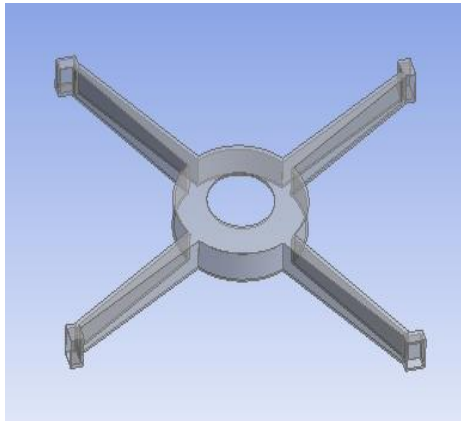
CAD model of Rotor Van Blade and design specifications of Rotor van with four blades
